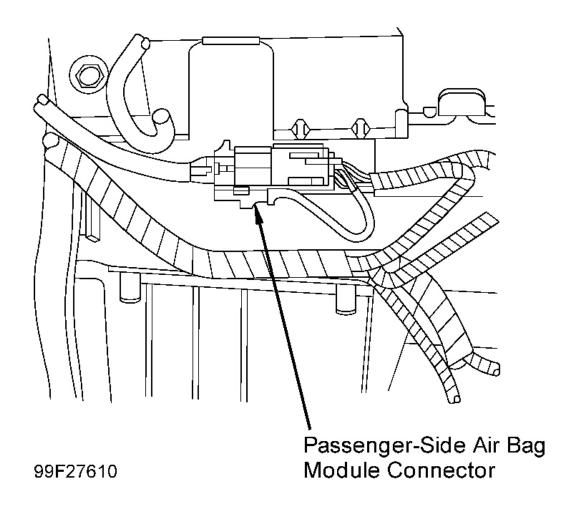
Identifying Passenger-side Air Bag Module Connector Courtesy of ISUZU MOTOR CO.
